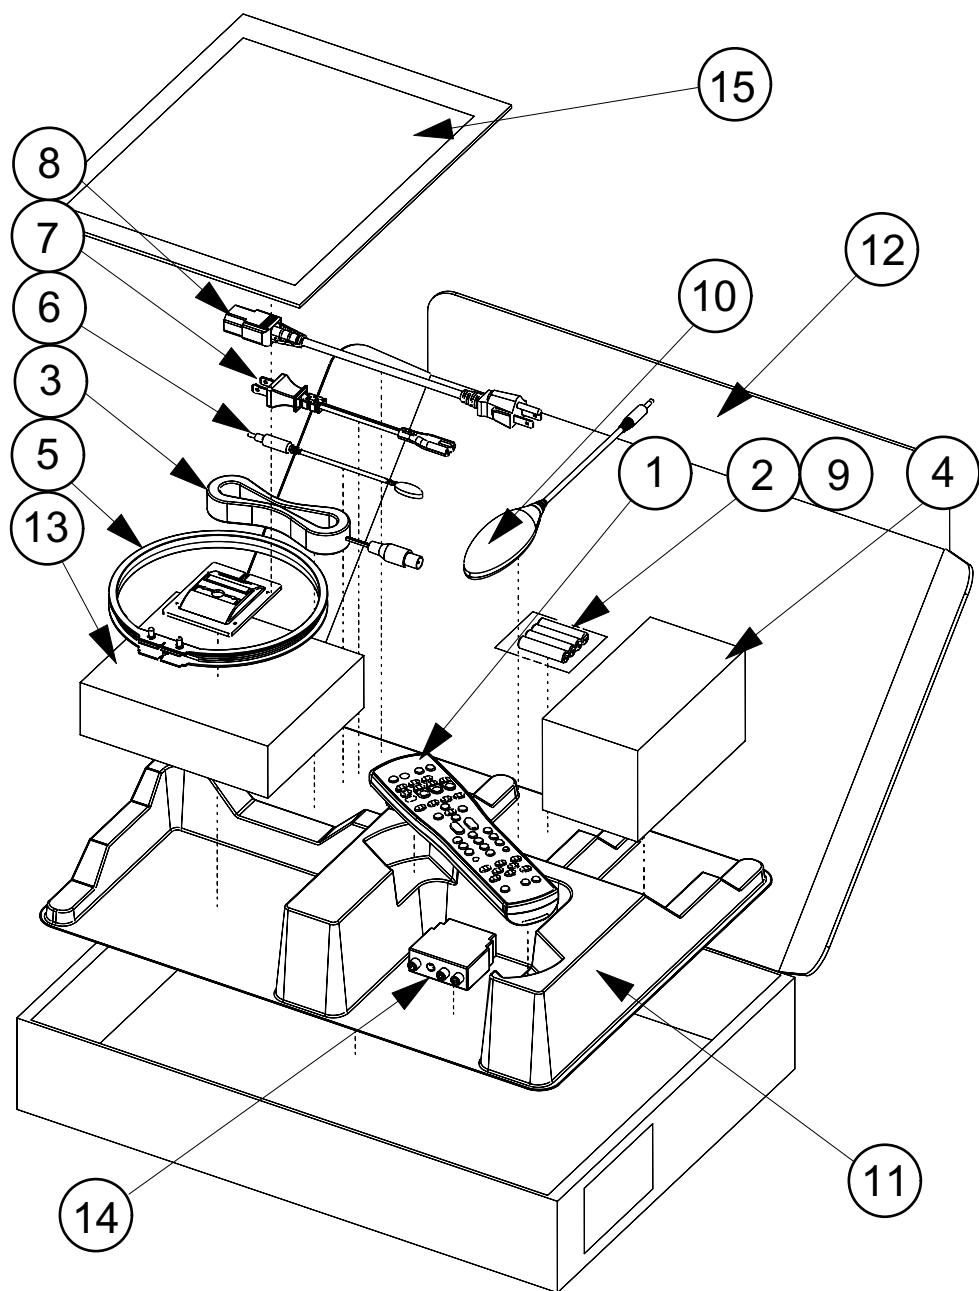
LS18, 28, 35 Essentials Kit Exploded View
